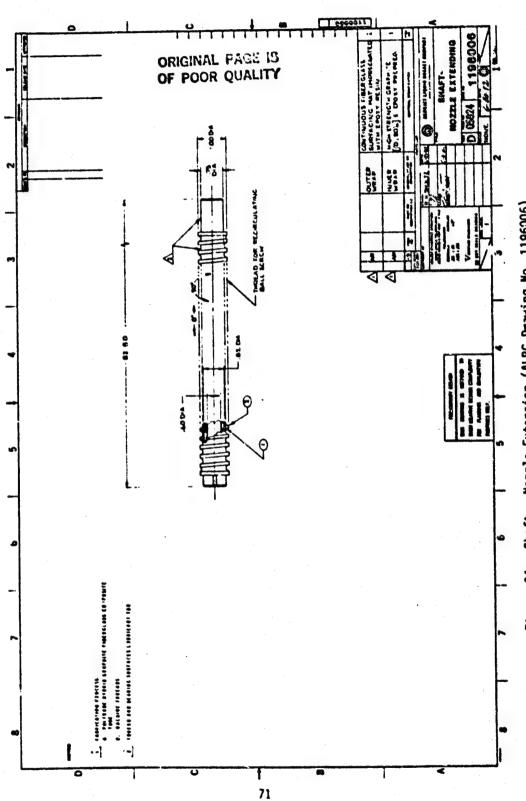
Shaft - Nozzle Extension (ALRC Drawing No. 1196006)
